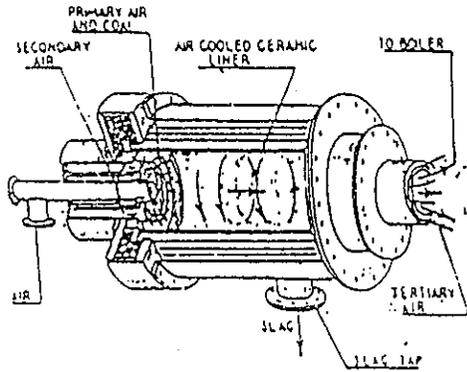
Drawing of Coal Tech's Air Cooled Combustor Installed on a 20 MMBtu/hr Oil Designed Boiler
